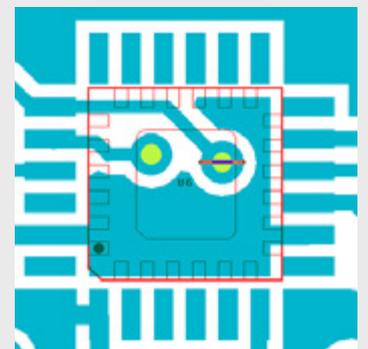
the large distance between the solder pads can cause poor solder joints and even tombstoning
